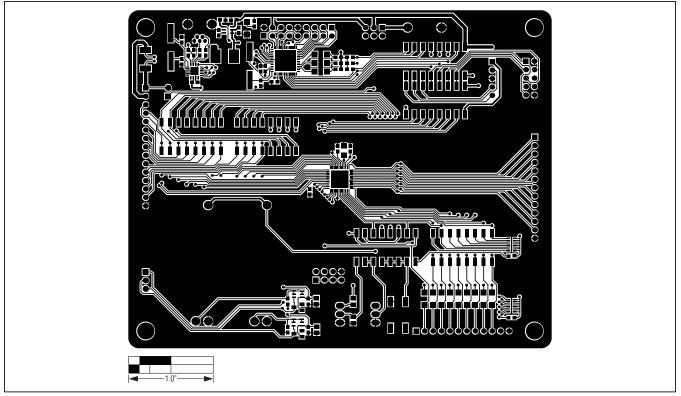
MAX16065EV Kit PCB Layout—Component Side
